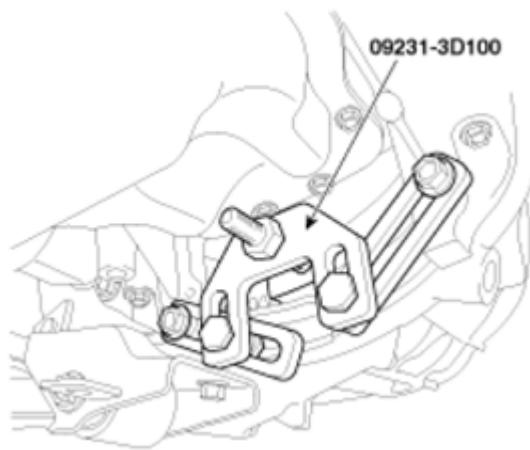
Identifying Transaxle Mounting Bolts
